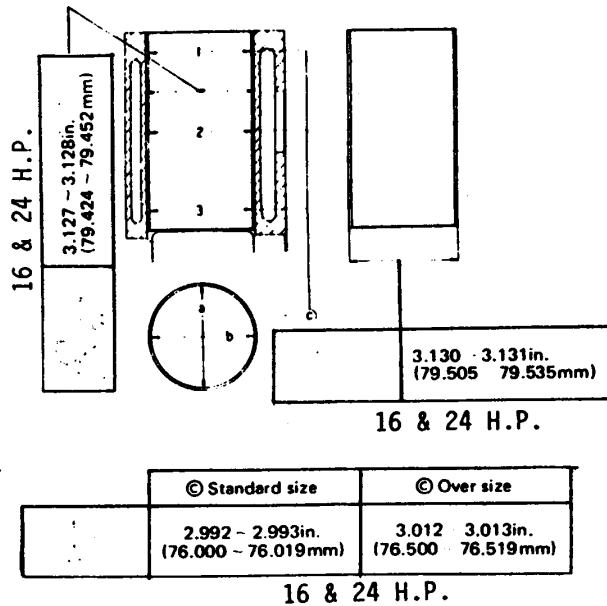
Standard Dimensions of Cylinder Liner and Liner Bore in Block
